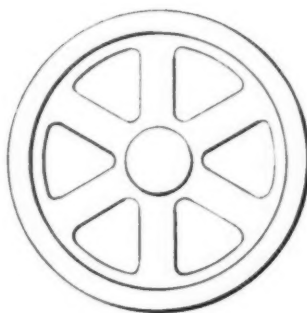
Sprocket Wheel as it Comes from Hammer.
